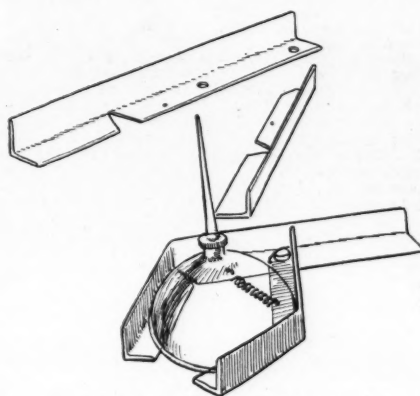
Oil can holder for attachment under hood which may be made from two pieces of angle iron
